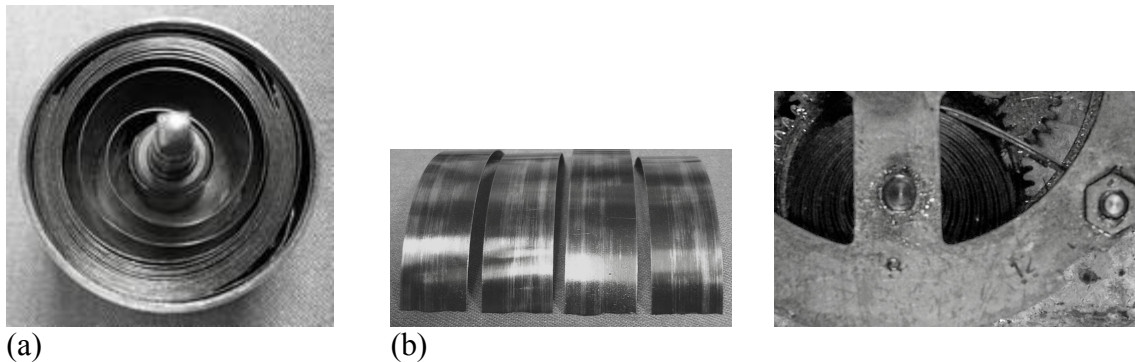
An enclosed mainspring broken into 6 pieces. (a) Still in the barrel, with cover removed. (b) Pieces broken at both ends. Photos courtesy Bill Butcher.
